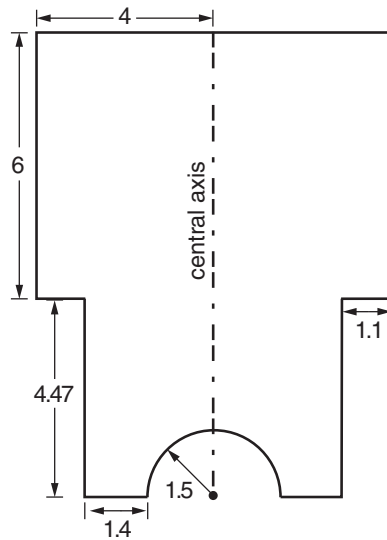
Rivet model geometry. All dimensions are in millimeters.
